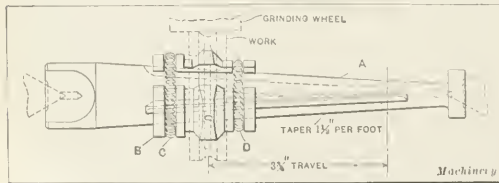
Special Taper Expanding Mandrel for holding Outer Ball Race when grinding External Diameter
